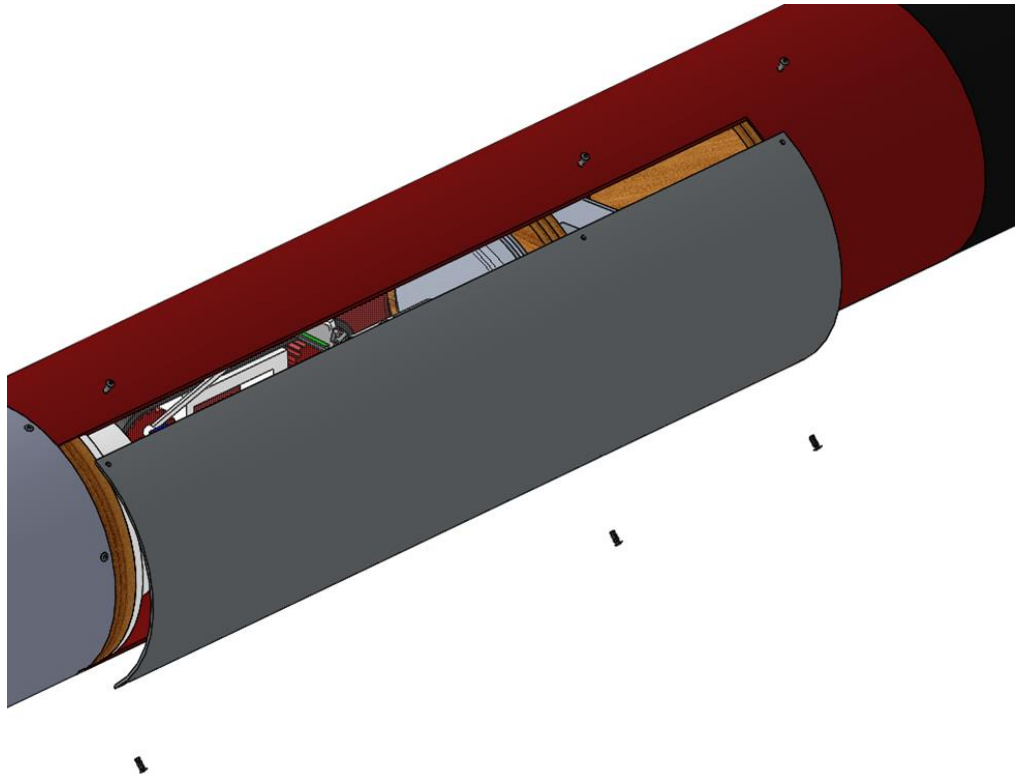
Exploded View of Midsection Access Hatch with Screw Placement
